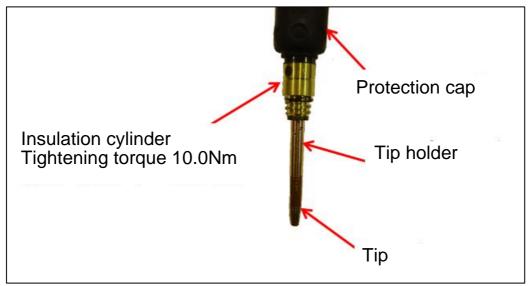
(b) Removing the insulated cap and the tip holder
